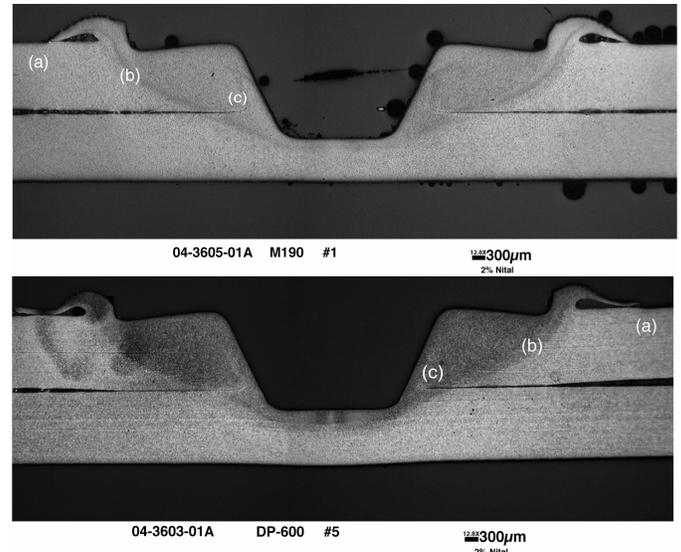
Cross-section of FSSW. Top: M-19; bottom: DP600. Welding time: 2.1 sec.
